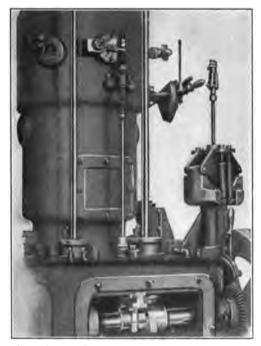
Cam-shaft and Igniter Details. Fairbanks-Morse Kerosene Engine.
